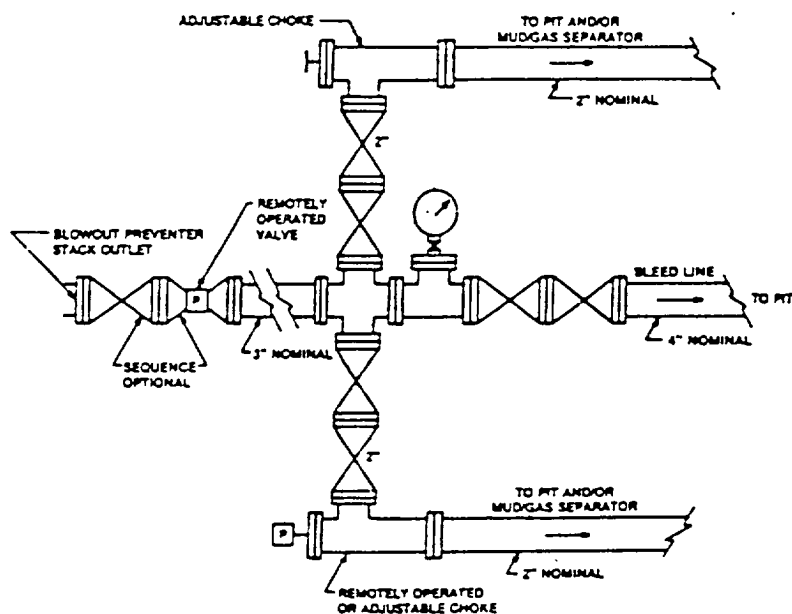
Typical choke manifold assembly for 3M rated working pressure service — surface installation.
